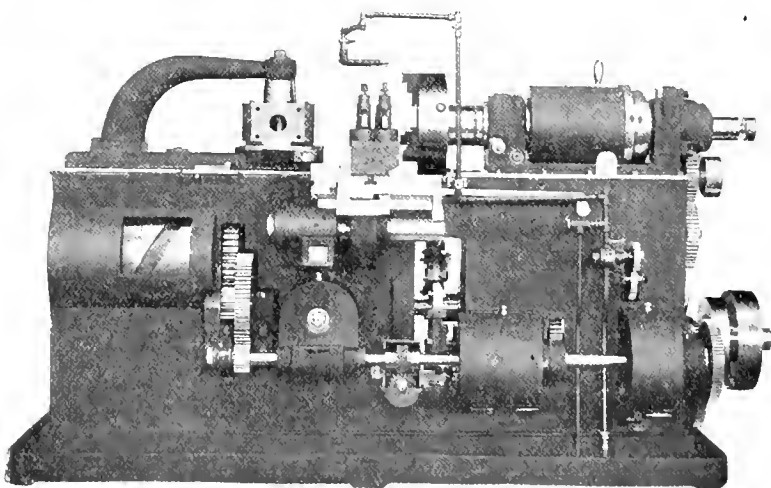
Rear View showing the Feed Shaft and its Connections with the Governing Disk and Cross- and Turret-slide Cams.
